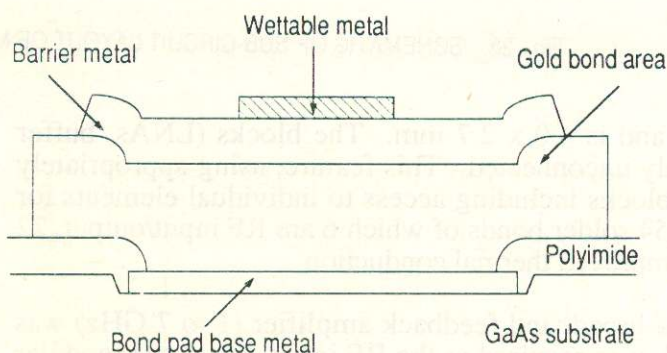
SOLDER BOND STRUCTURE ON GaAs MMIC
